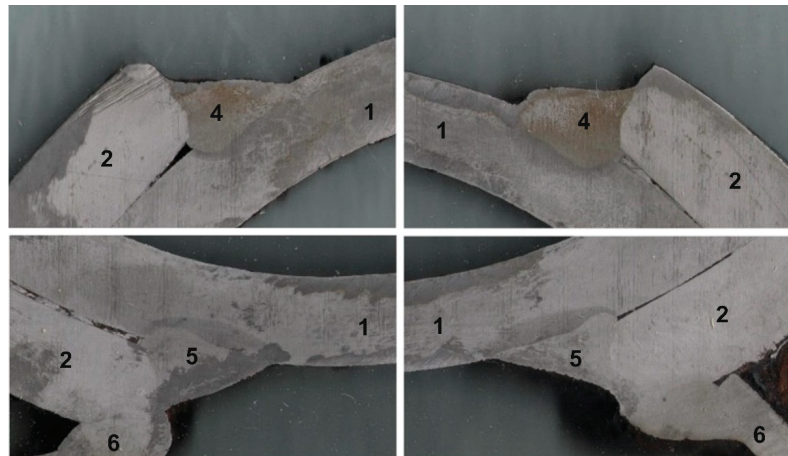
Cross-section of angle welds: 1—axis; 2—bushing; 4, 5—angle welds; 6—arm.
